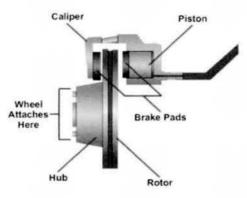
Brake Disc Components (Source: www.howstuffworks.com)
